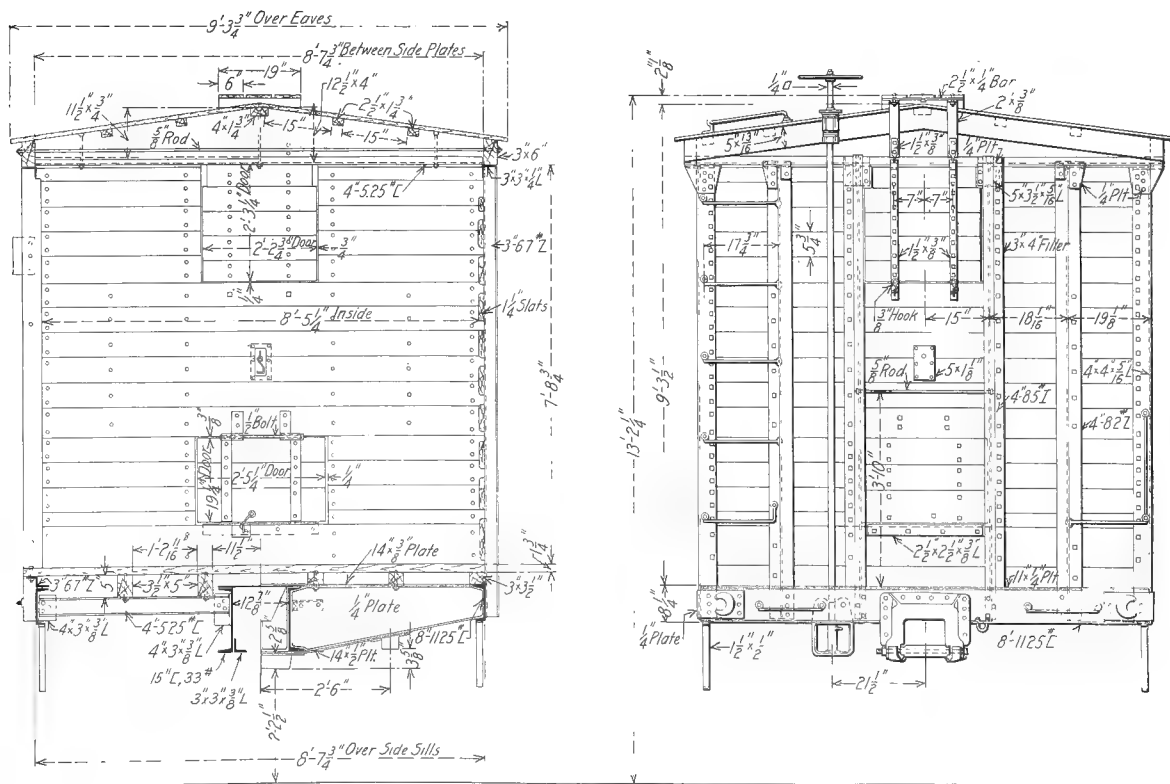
End Elevation and Cross Sections of Mather 40-Ton Capacity Steel Frame Stock Car. See also Fig. 347.
